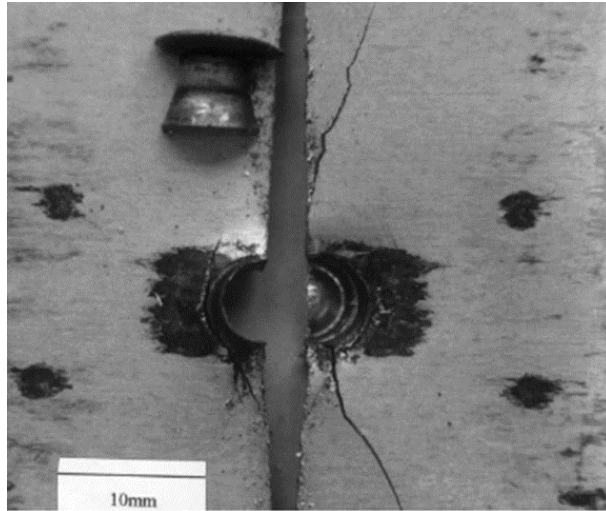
Fretting scars on the surface of the riveted plate [6]
